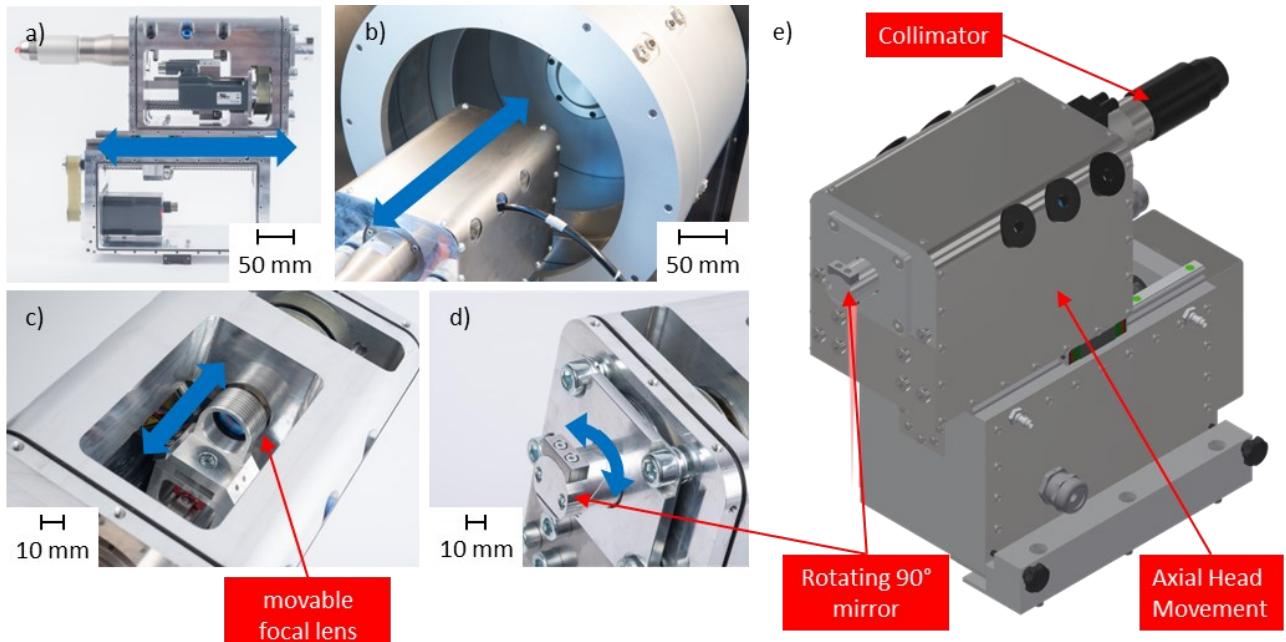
(a) side view on the uncovered laser optical head; (b) integrated laser optical head in the RotaPrint test rig; (c) top view on the uncovered laser optical head including moveable focusing lens; (d) front view on the rotating laser lens; (e) full view on designed laser optical head as CAD
